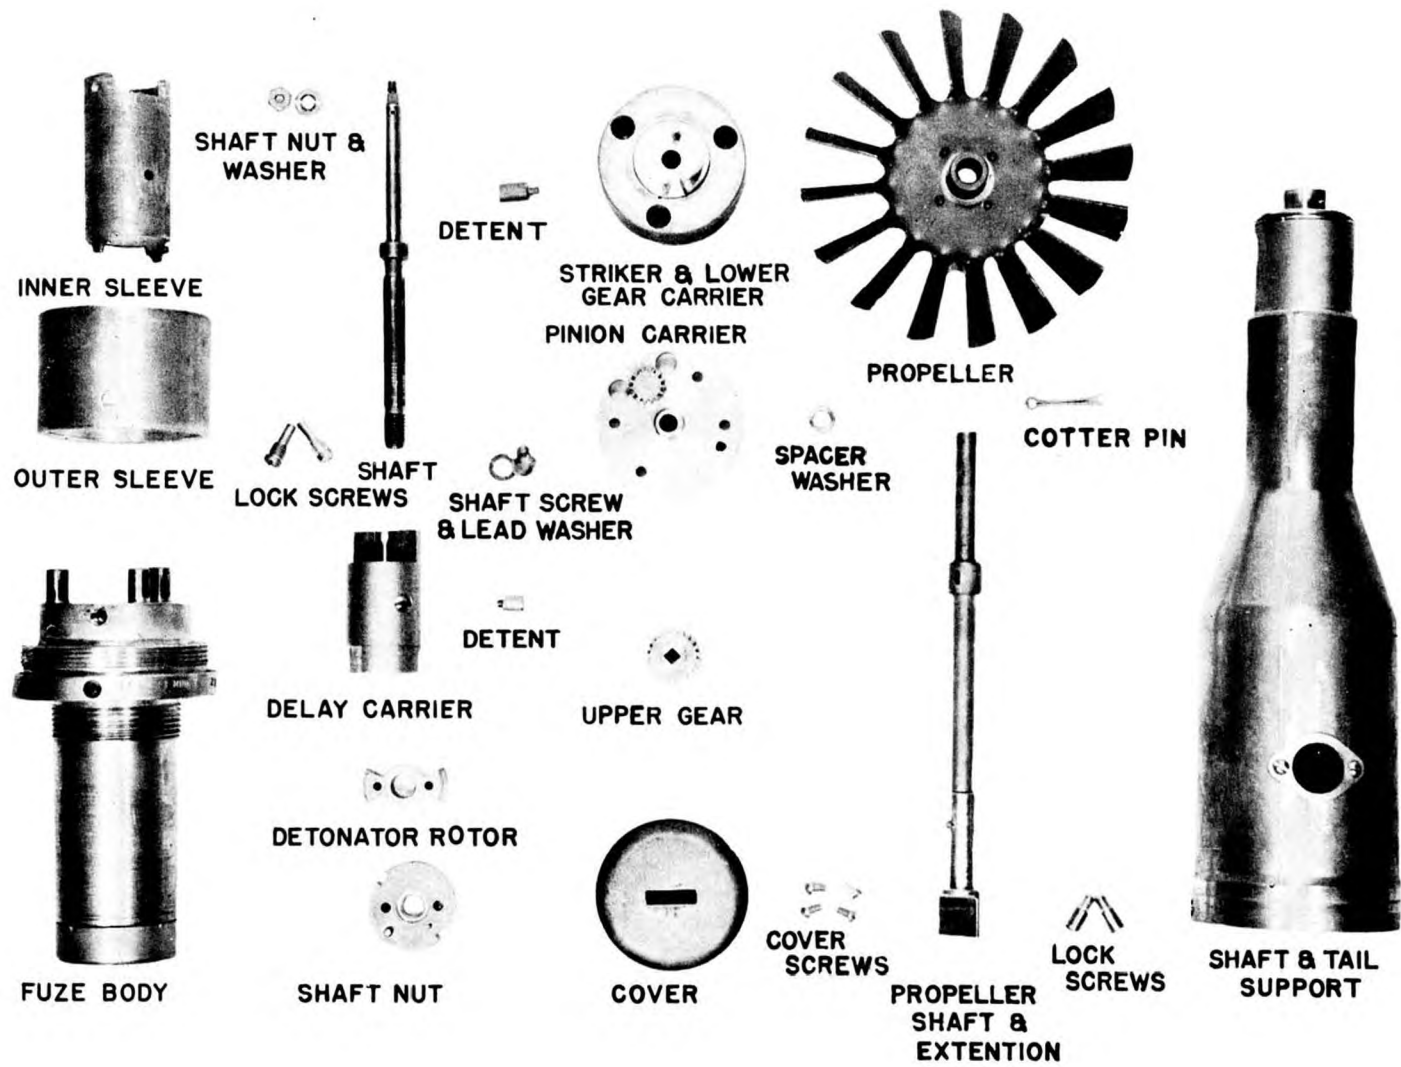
BOMB FUZE, MARK 228 & MARK 228 MOD 1: DISASSEMBLED PARTS
